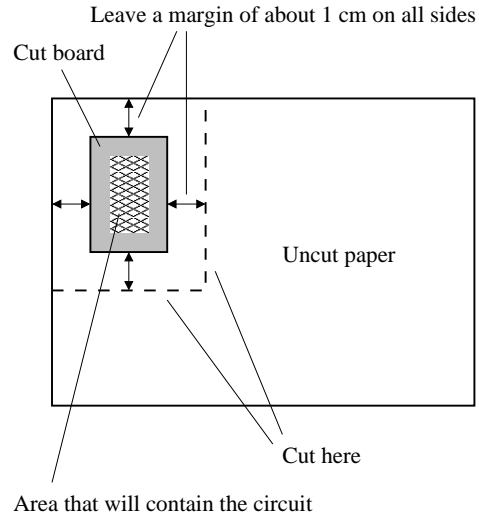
Cut the transfer paper such that there is a margin of about 1 cm on each side of the cut board.
